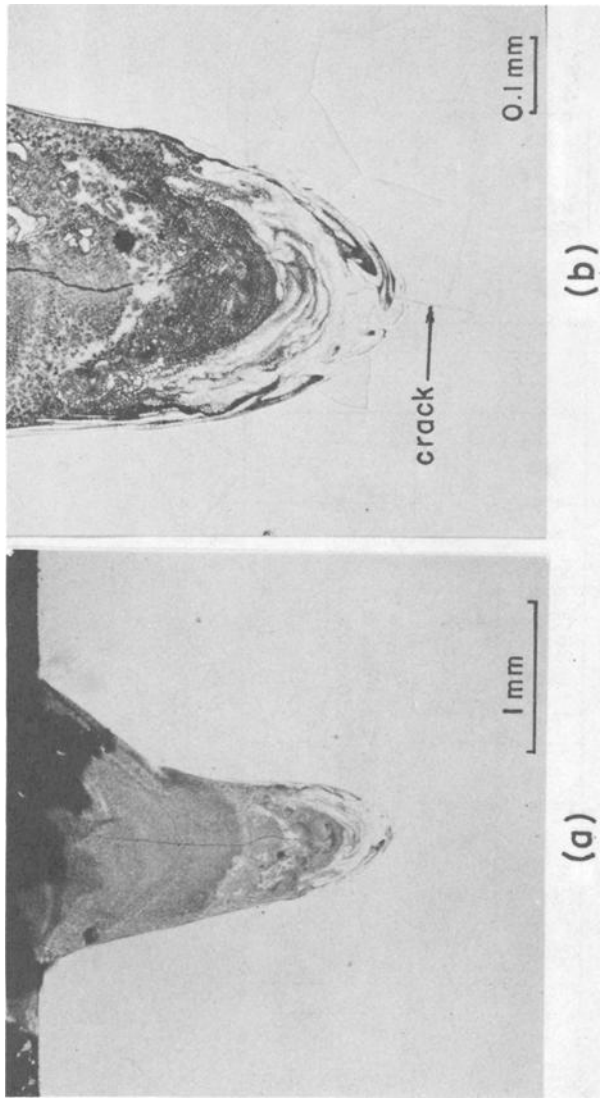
Example of cross section of brittle weld bead on 26Cr-1Mo steel specimen. (a) cross section; (b) micro-structure in the root of the bead, (a).
